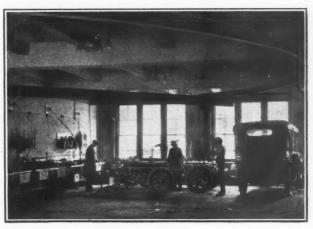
A jib crane must be provided with support for the outboard end of the beam. This is often done by means of tie-rods. In this case the ceiling is too low to permit of this construction, so the outer end of the beam is furnished with a trolley which runs on a semi-circular rail
